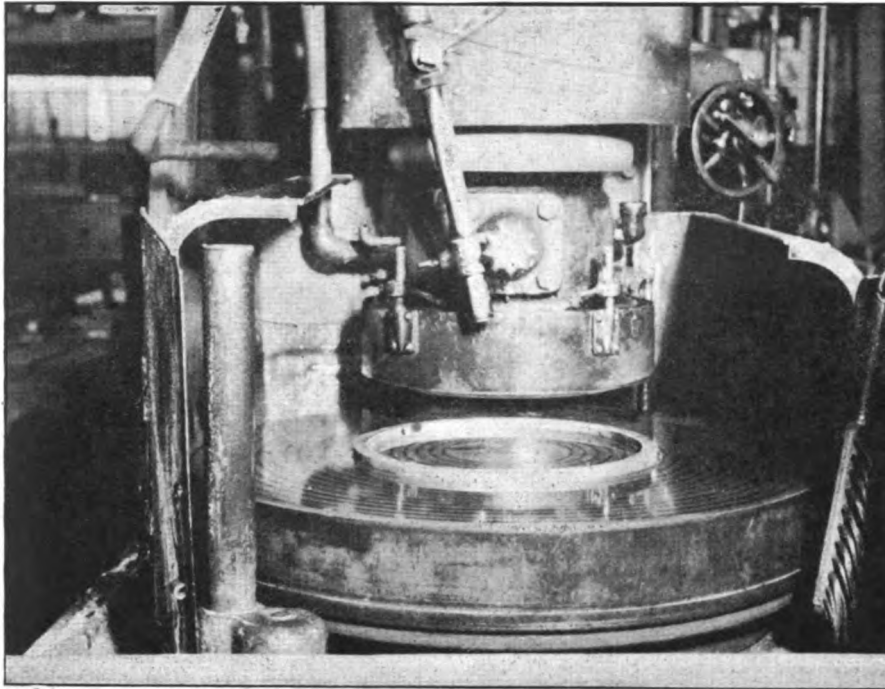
SIDES OF PISTON RINGS ARE ACCURATELY FINISHED BY GRINDING
